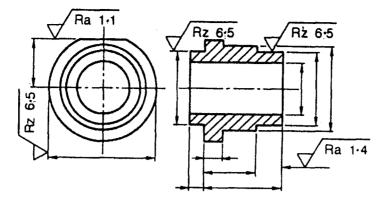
SURFACE TEXTURE REQUIREMENTS ON EXTENSION LINES OF CYLINDRICAL FEATURES
